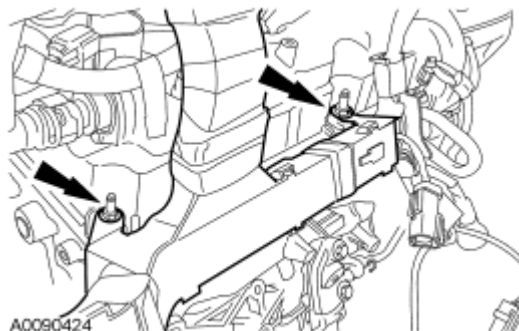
Locating Engine Control Wiring Harness & Nuts
